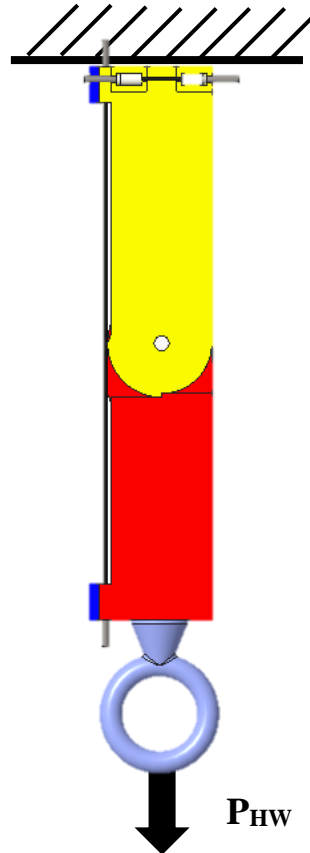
SMA Cubic Truss Joint for Sensing Test with Hanging Weight Load.
